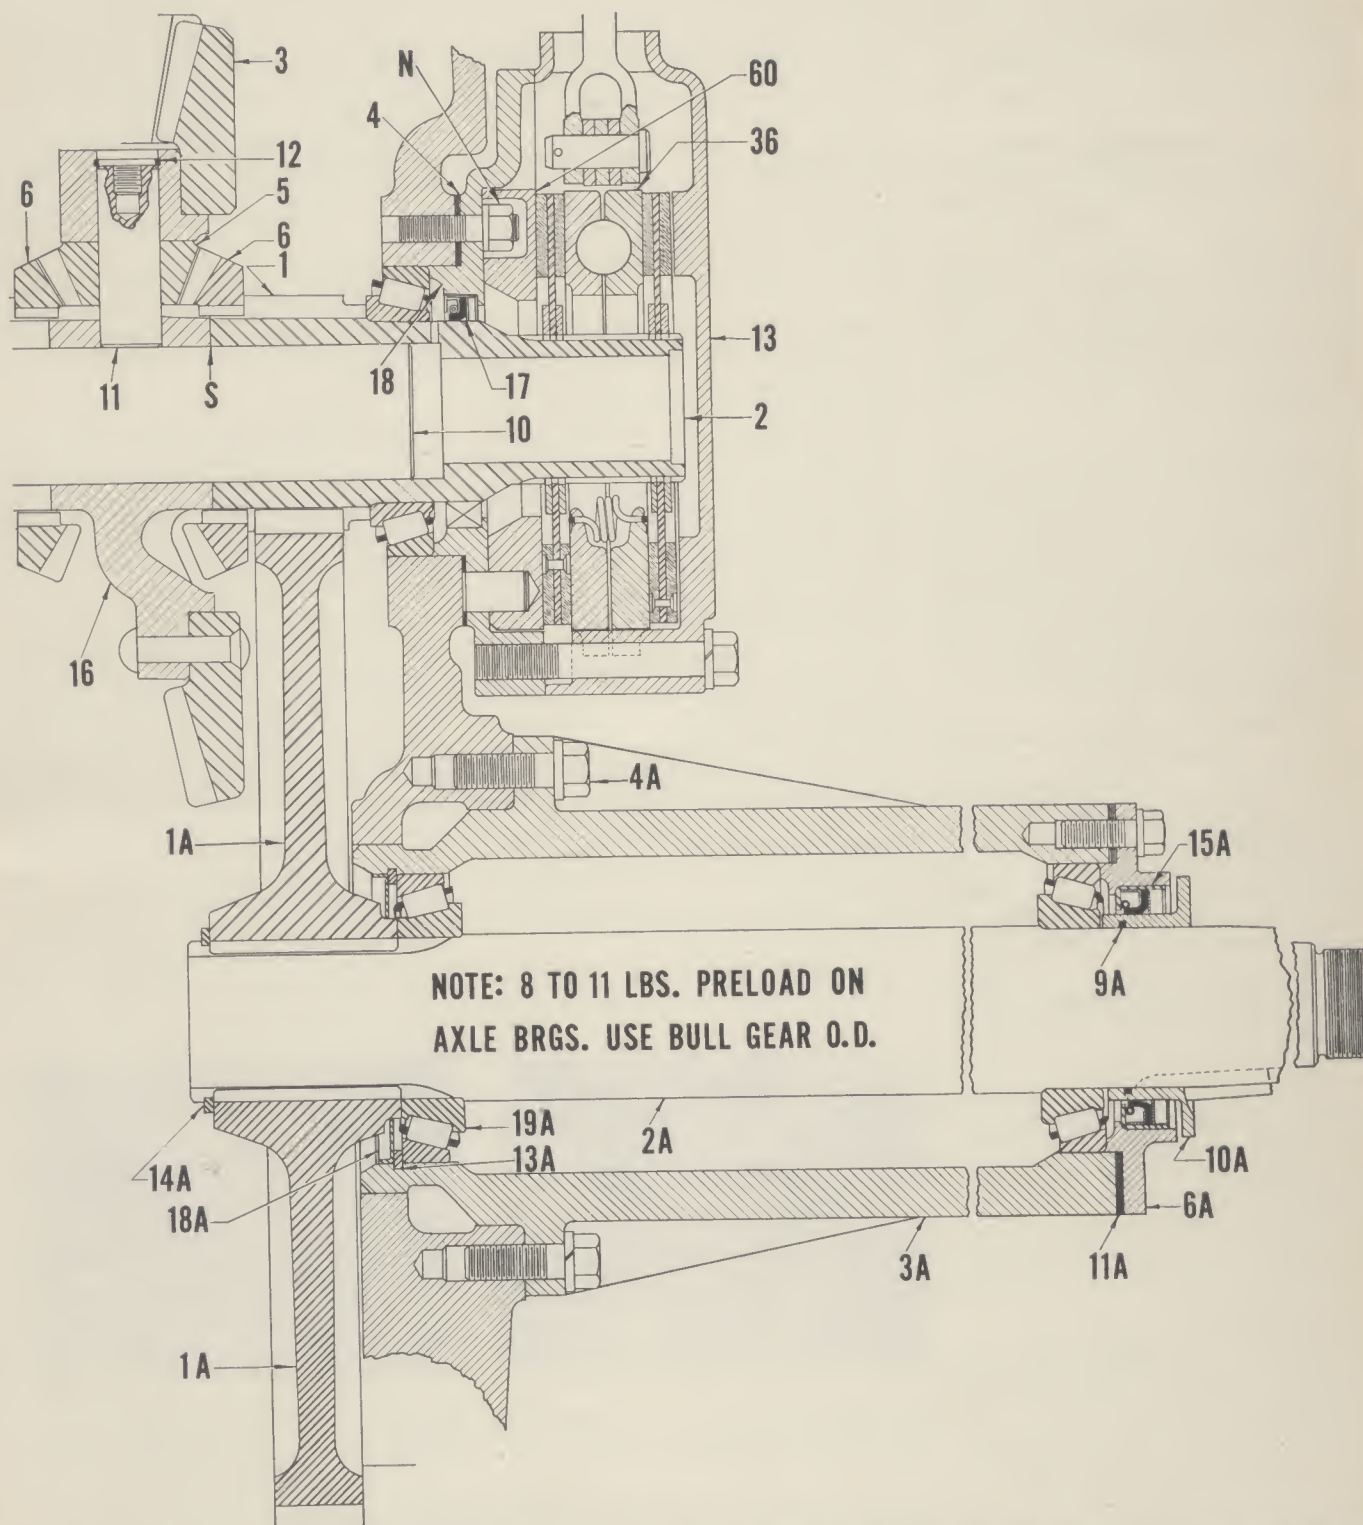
Details of bull pinion differential, bevel ring gear, brakes and final drive for one side of tractor equipped with 6 speed transmission. Beginning with serial 521300, the differential is of the four pinion type. The four pinion type can be used in place of the two pinion unit by also changing the bevel ring gear and side gears.
